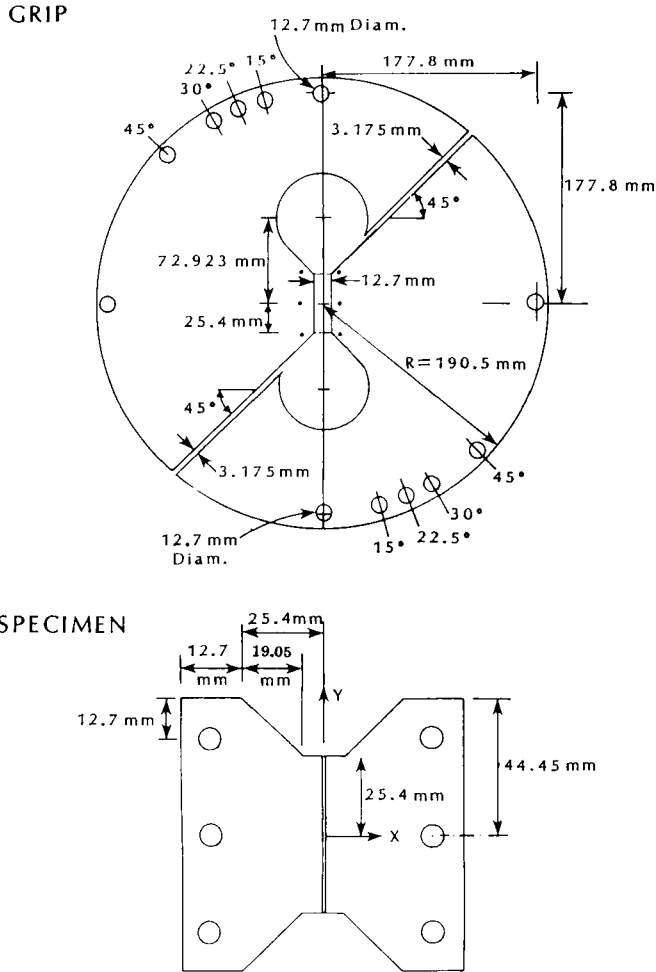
Dimensions of the stiff-adhered specimen and grips.
